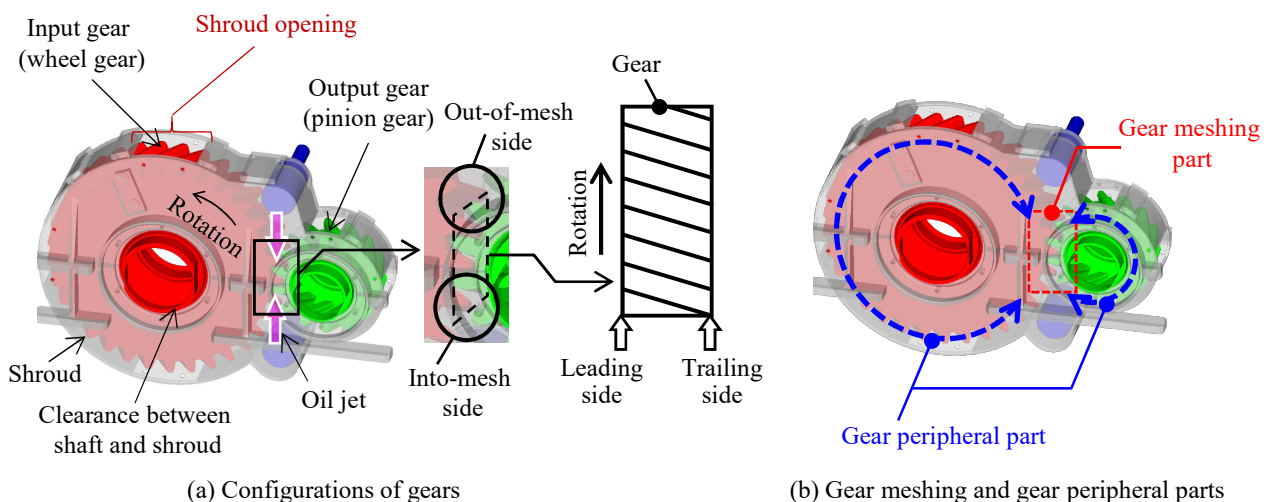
Gear and shroud configurations; definitions of the gear parts
